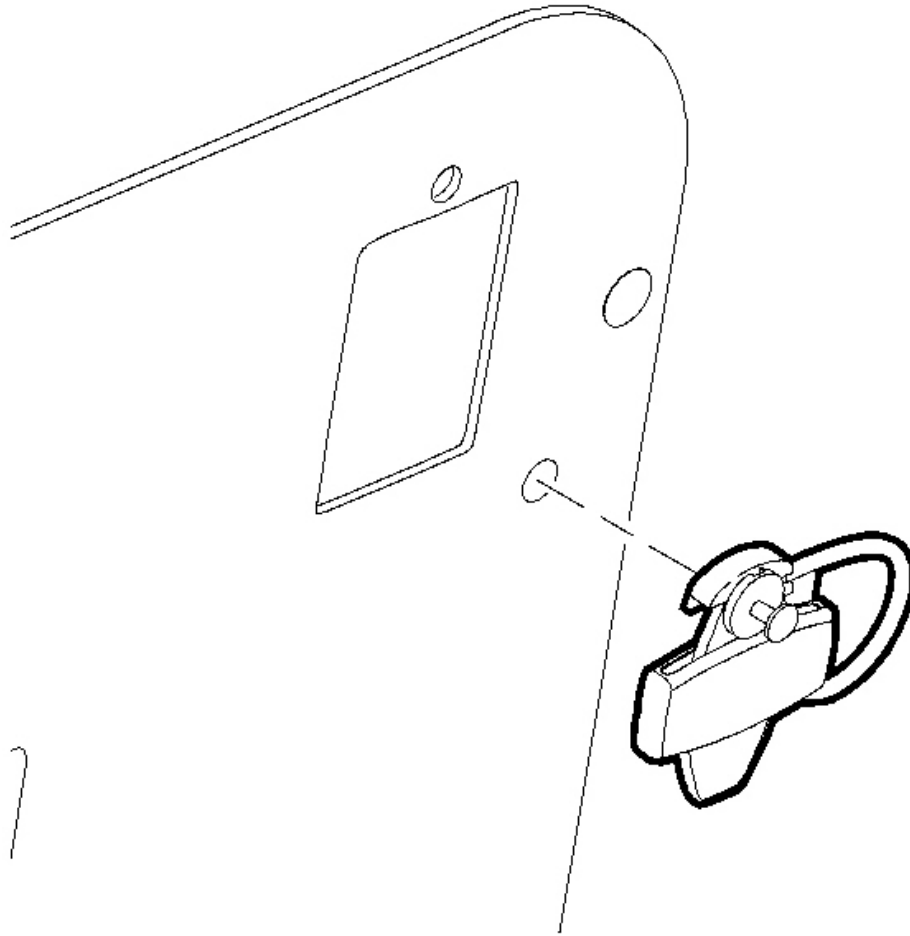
Shoulder Belt Bezel & Rear Seat Back
